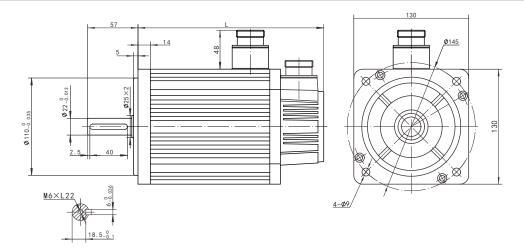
Installation dimension drawing of WE series 130 flange servo motor
